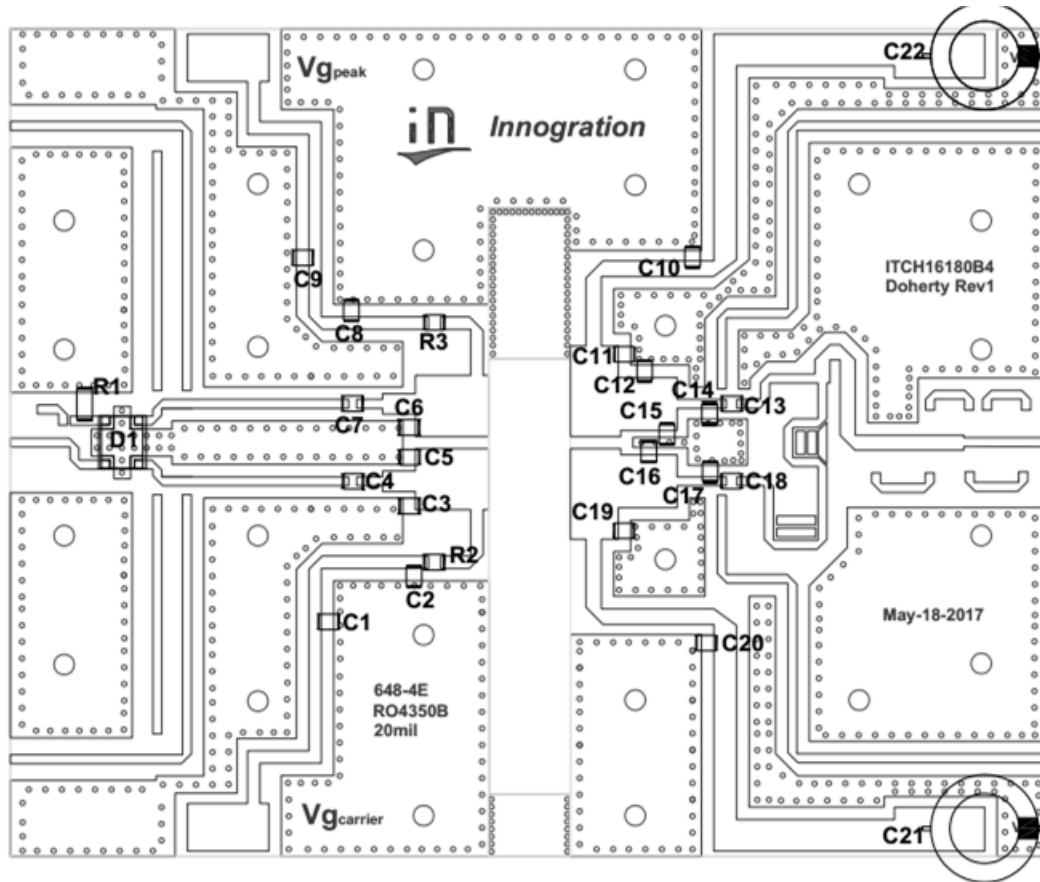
Test Circuit Component Layout (1447MHz~1467MHz)
